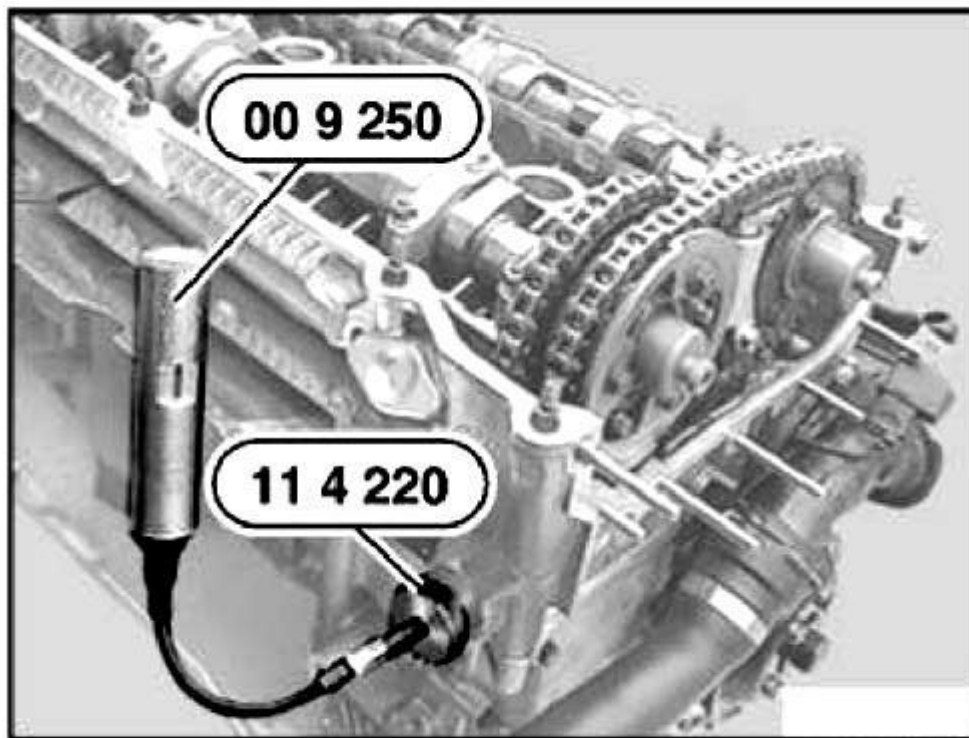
Pressing Down Chain Tensioner At Top And Removing Special Tool
